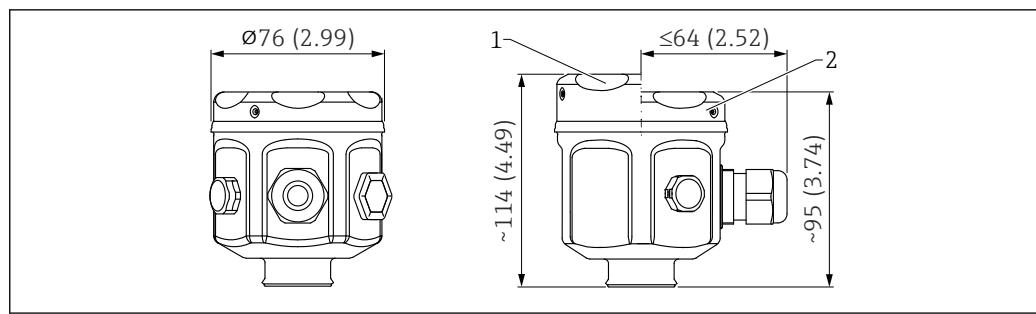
Dimensions of 316L housing, hygienic. Unit of measurement mm (in)
